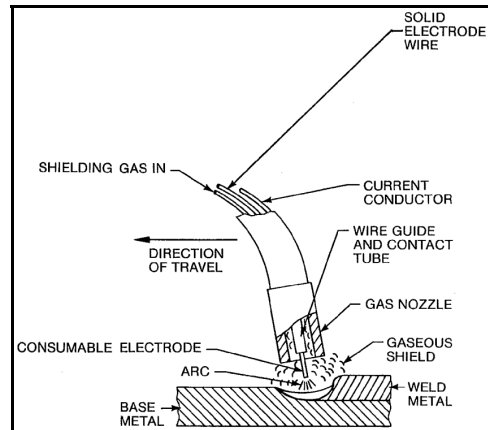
Schematic of GMAW Equipment Layout & Process [21 - Pg. 111]
